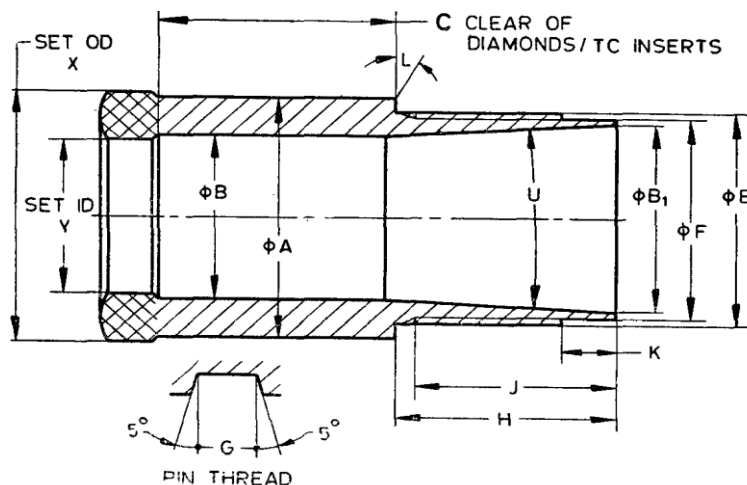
'WT' DESIGN DOUBLE TUBE CORE BARREL — BEVEL WALL CORE BIT
